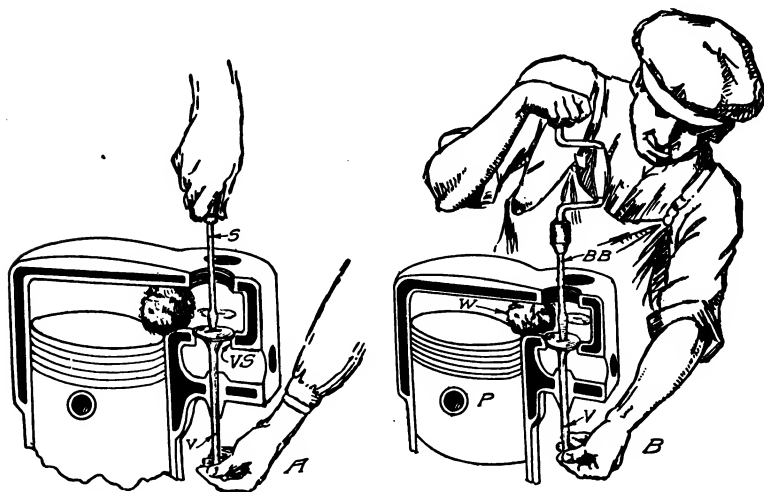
Two methods of Grinding-In Valves: (A) by Hand, Using a Screwdriver; (B) with Brace, Screwdriver and Bit
